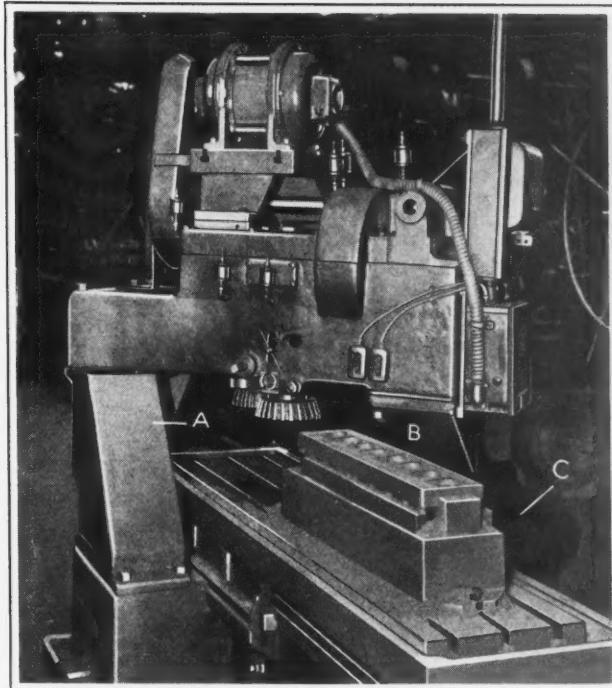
Planer-type Milling Machine in which the Head was Remounted at an Angle to Bring the Cutters into Line for a New Job
